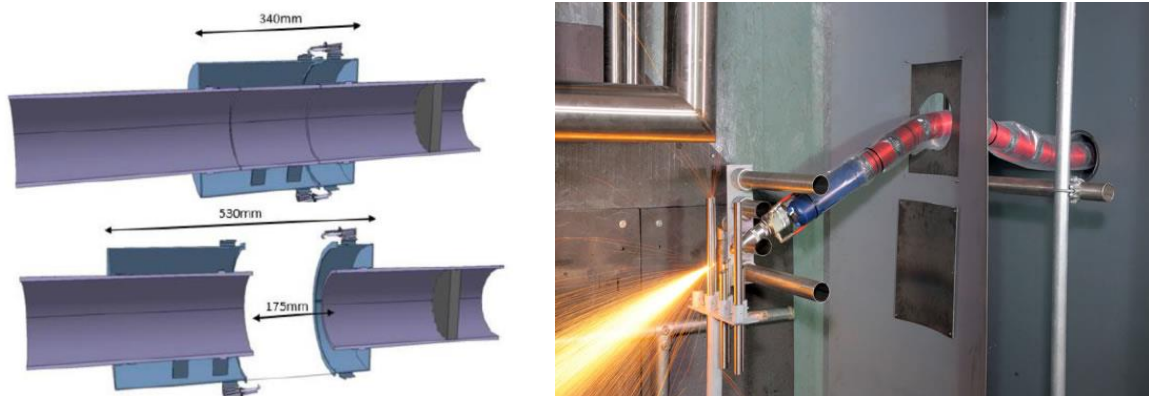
Vacuum pipe before and after cutting which has to be maintained remotely or assisted-manually (left) and a possible distantly-operated cutting robotic tool (right).
